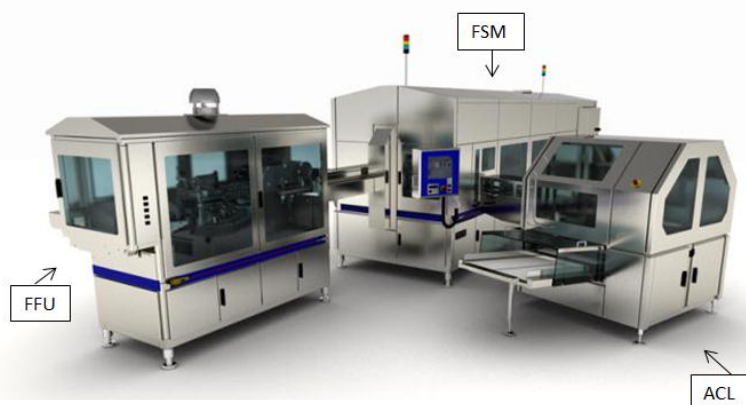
, TPR1 main machine parts: ACL, FFU and FSM.
